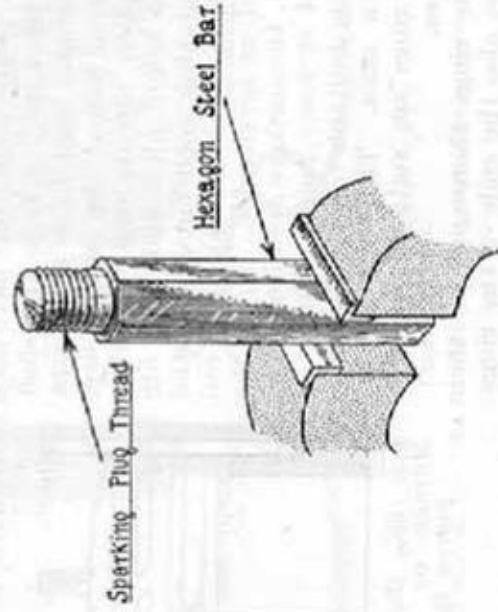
A HOLDER THAT IS USEFUL WHEN DECARBONIZING THE CYLINDER HEAD
